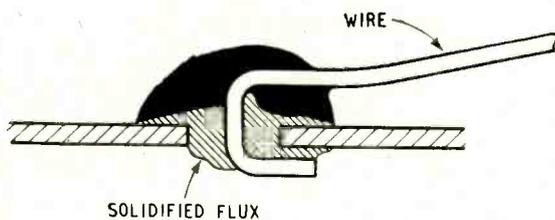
Joint which has every appearance of being soldered but is actually held together by solidified flux.
